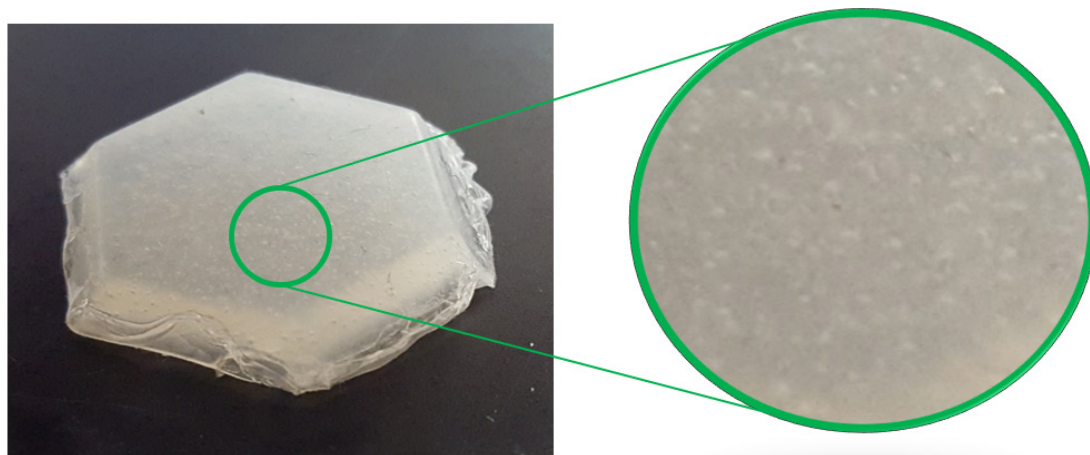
Bubbles Still Remain in Platsil After Vacuum Degassing
